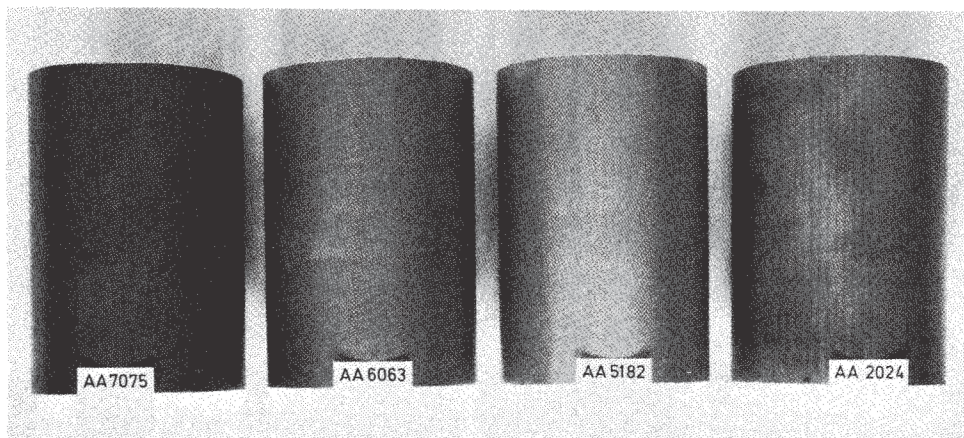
Surface finish of 8 inch billets of different alloys, cast with the VAW Air Veil Mold
